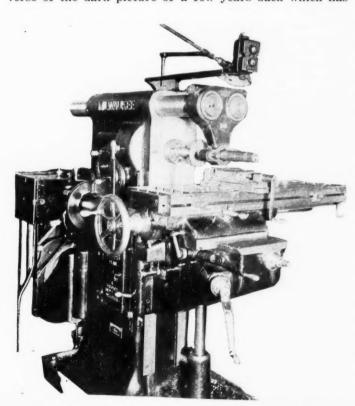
Button control assembly on bracket above overarm. Controller and motor behind machine
